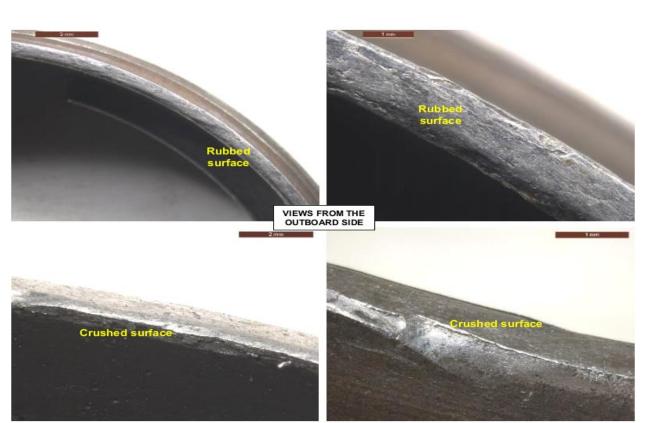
Details of the rubbed and crushed outboard circumferential surface of the outboard locking nut
